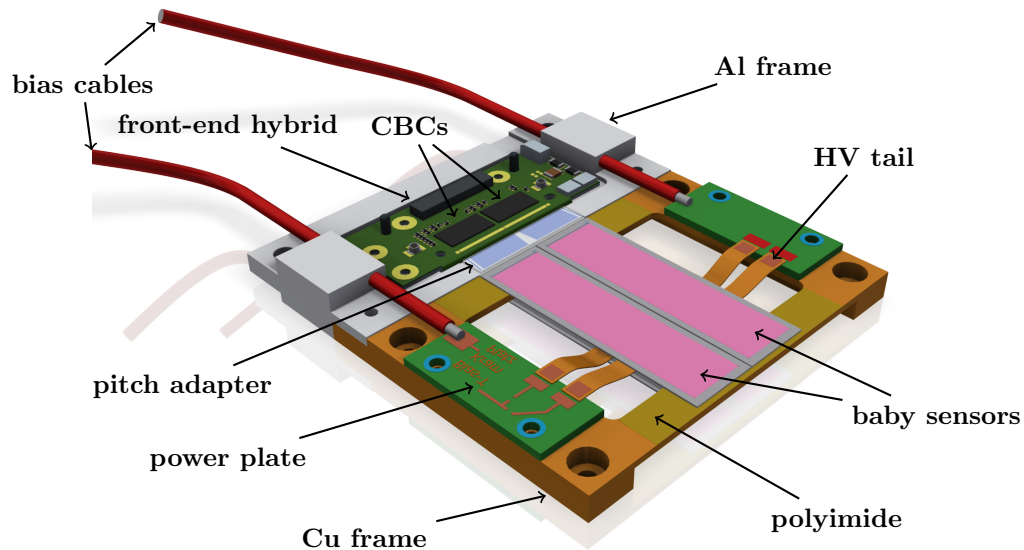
Rendering of the Mini Module CAD drawing. Two CBC3.0 read out four baby sensors with 127 strips each. The sensors are aligned in parallel in two layers with a spacing of 1.4 mm. The sensors of each stack are made of the same material. One double layer is made of FZ290 and one of thFZ240 sensors. Two power plates bias the two stacks separately.
